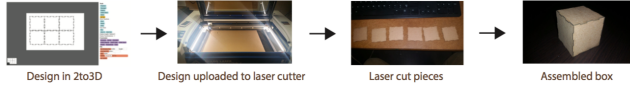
Full digital fabrication workflow using 2to3D. The laser cutter we had access to used Corel-Draw for CAM so the drawing was created in 2to3D and imported to CorelDraw just for printing.
